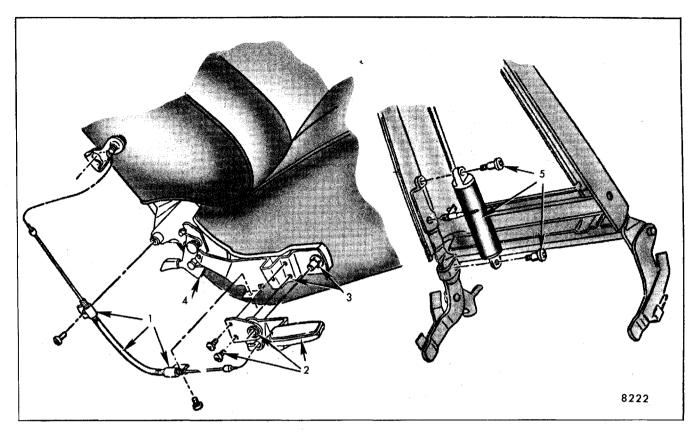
Bucket Seat Back Reclining Actuator Assembly and Remote Control - X Style Passenger Seat
